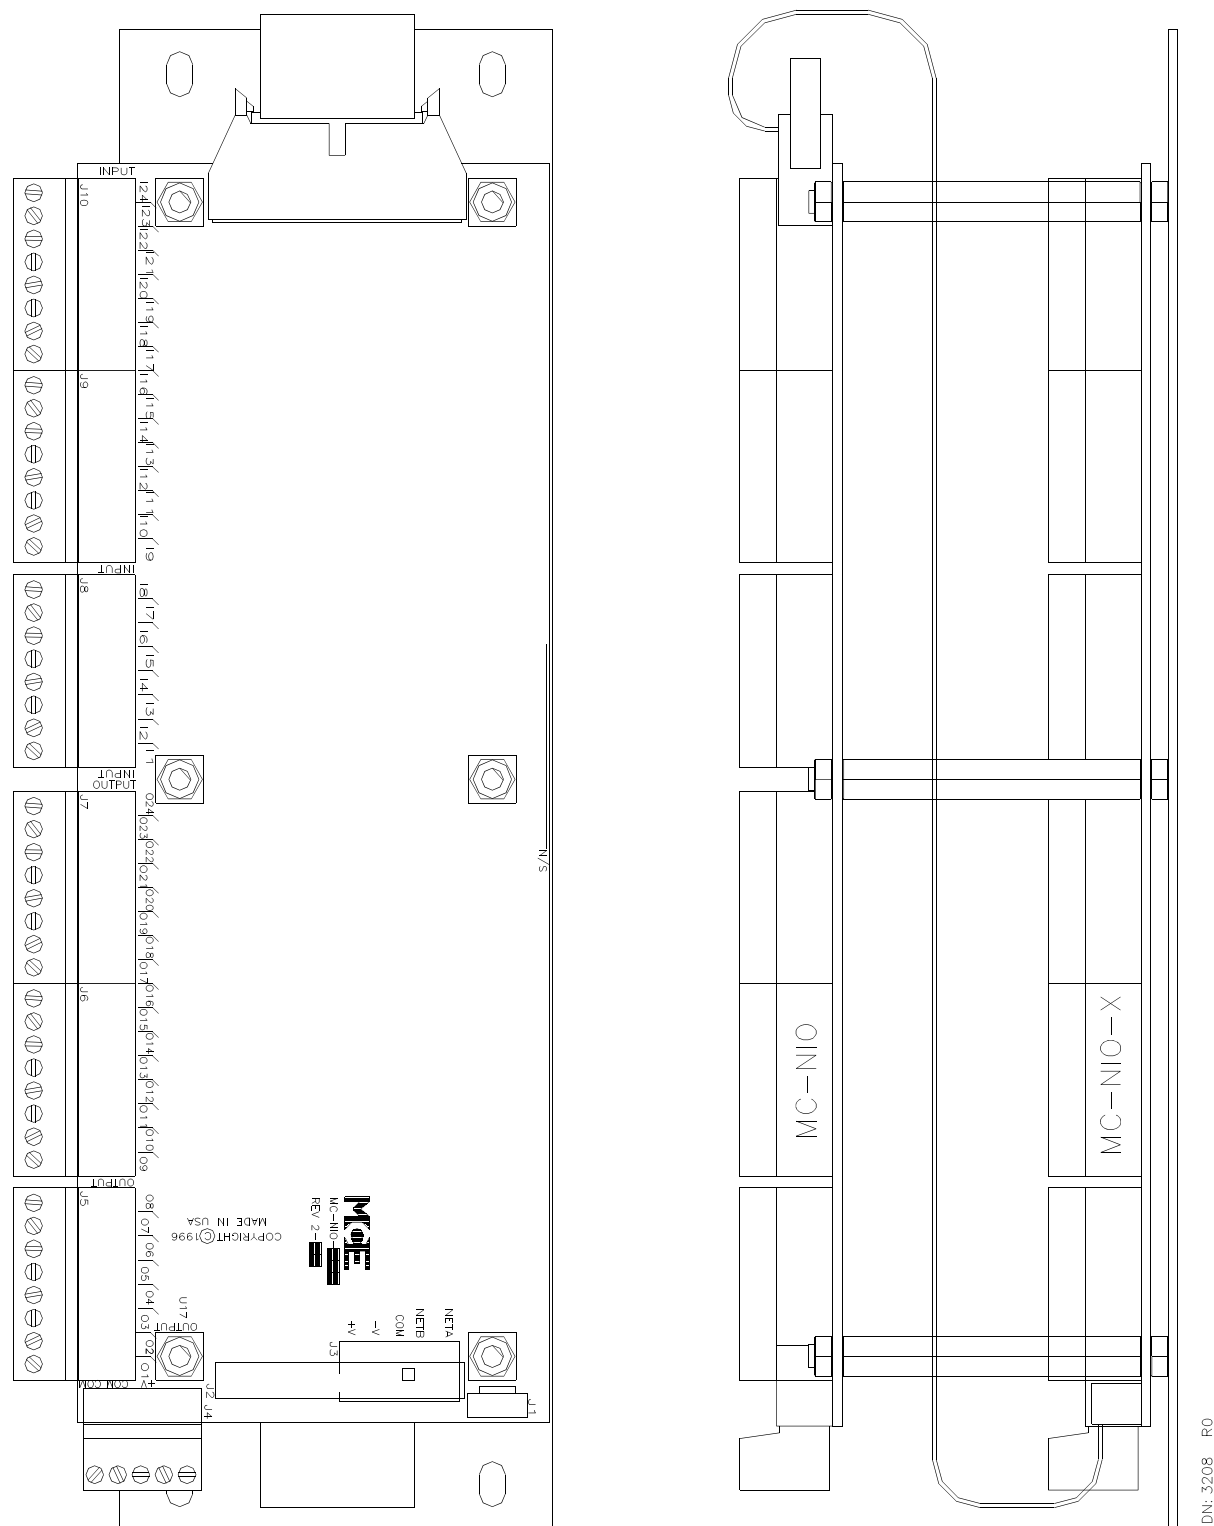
Mounting Option 2: Boards Placed End to End
